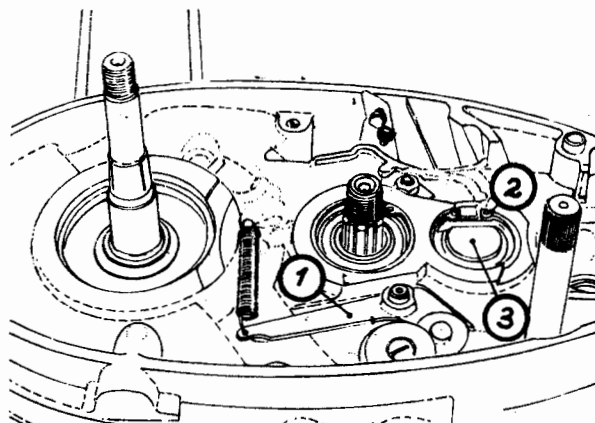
Before separating the casing halves, remove catch lever (1), circlip (2) and cap for output shaft (3) in order to prevent damage to the gear-shift cylinder.
